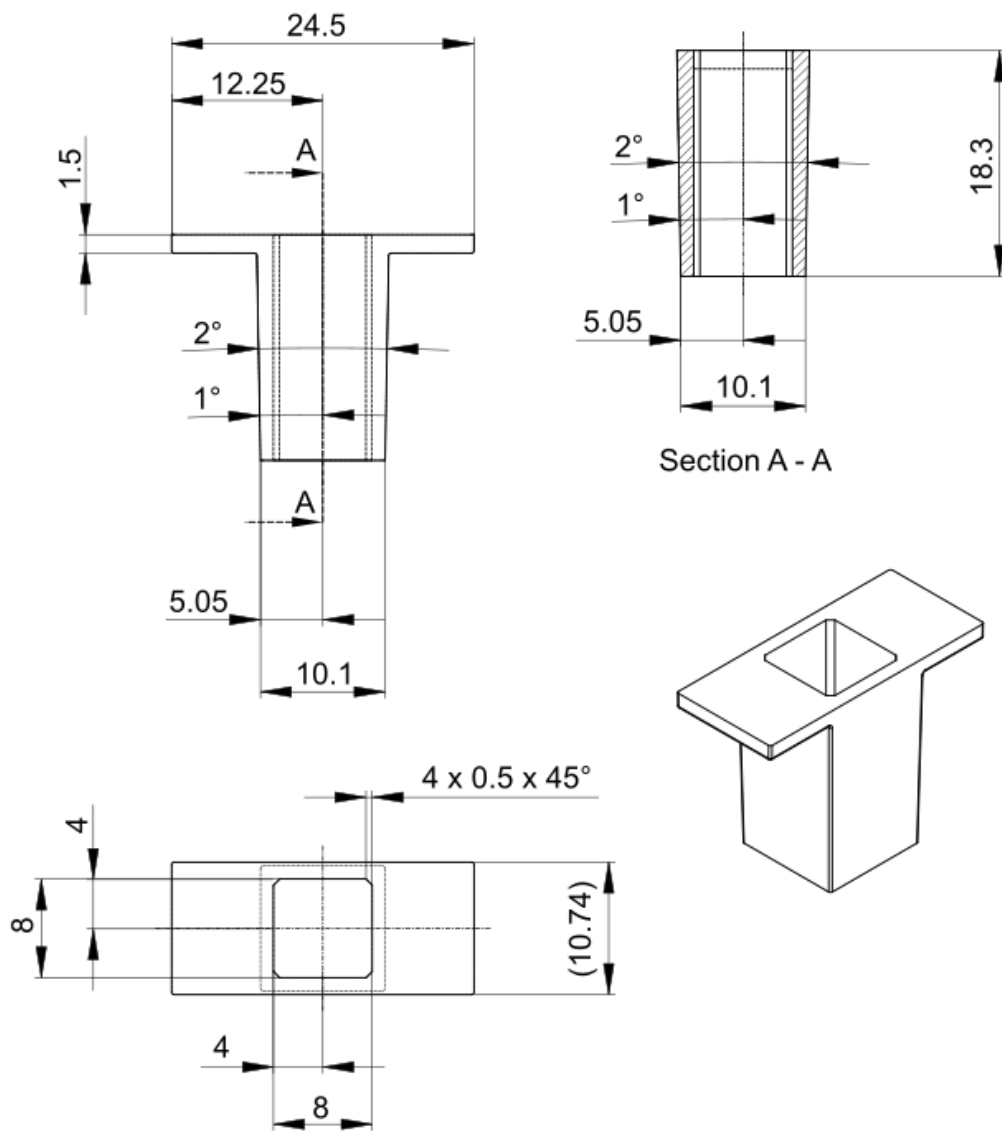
Construction drawing of the upper part of the sample holder. The dimensions are displayed in mm. Unspecified radii have a size of 0.2 mm.[127]
